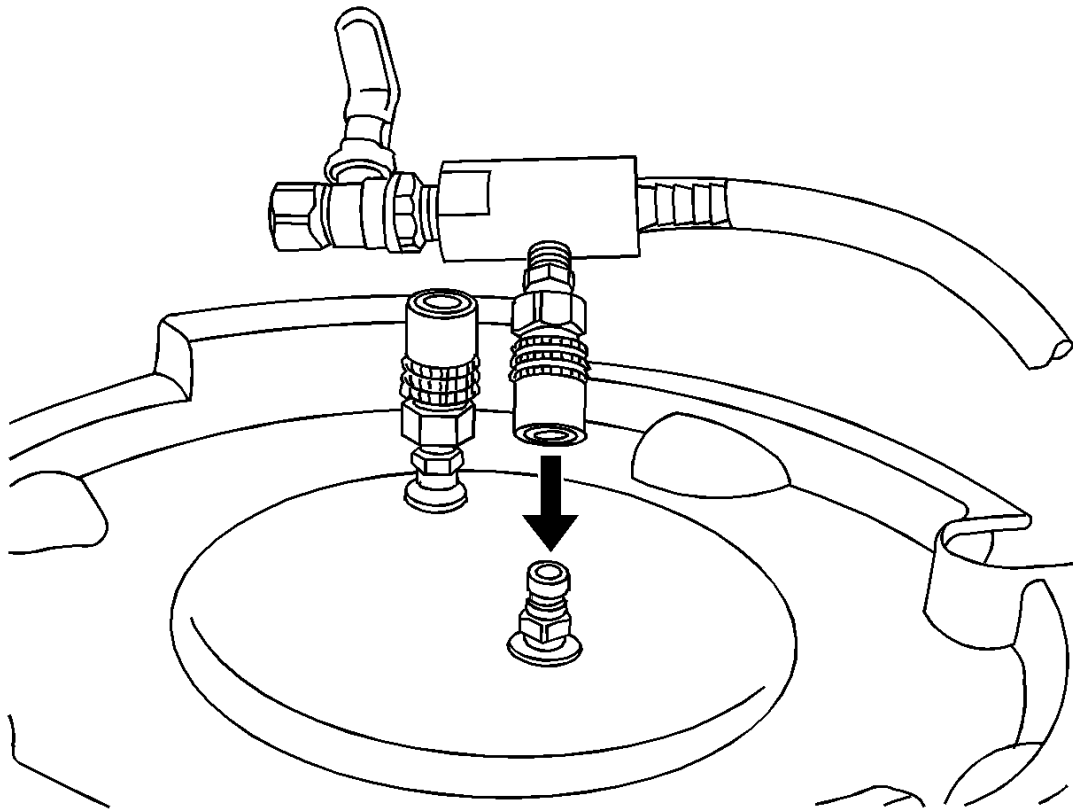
View Of Venturi Assembly & Vacuum Tank
